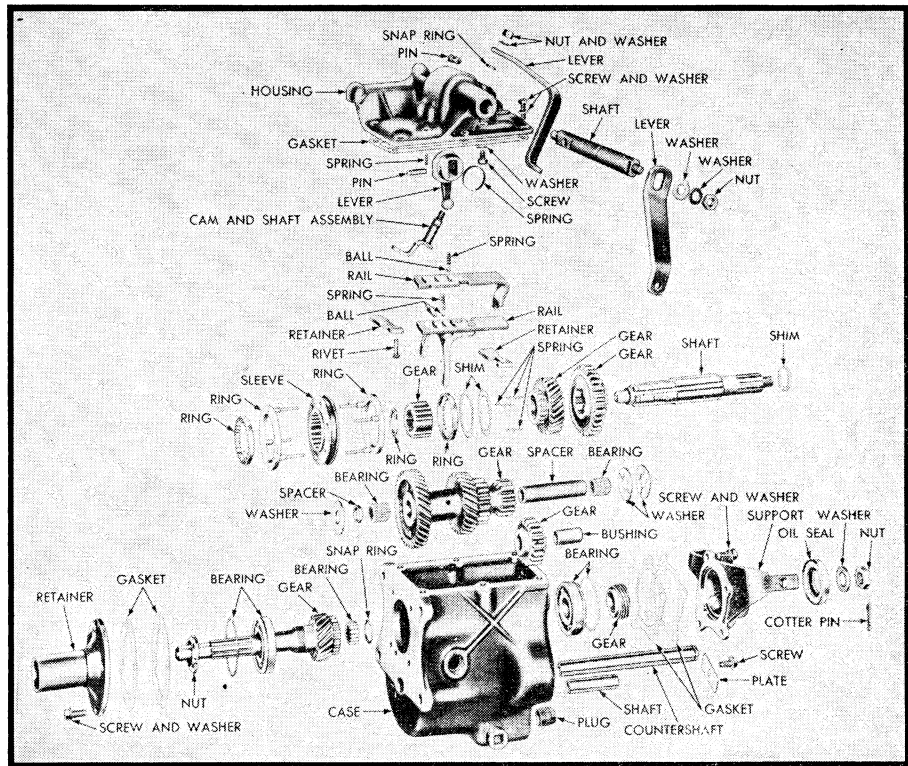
New Process three-speed synchromesh transmission with remote control, 1950-58
